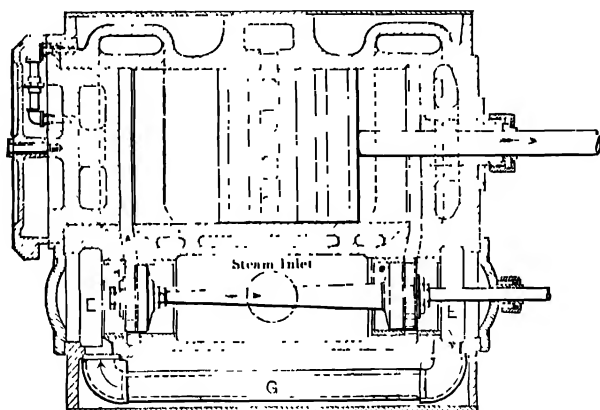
Harrisburgh "Dual-Clearance" Uniflow Engine.
